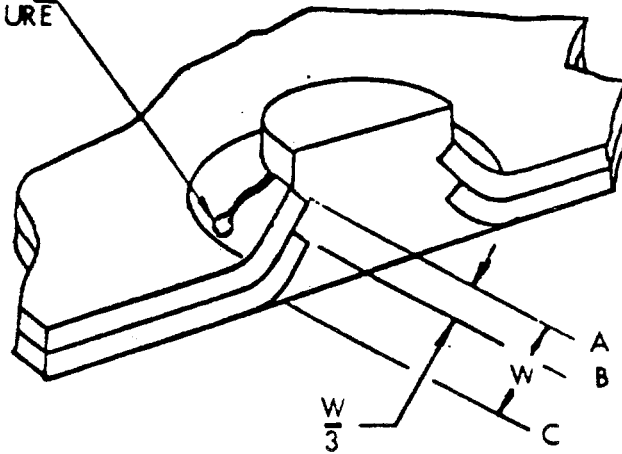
CRACKED RIVET DIMPLES
